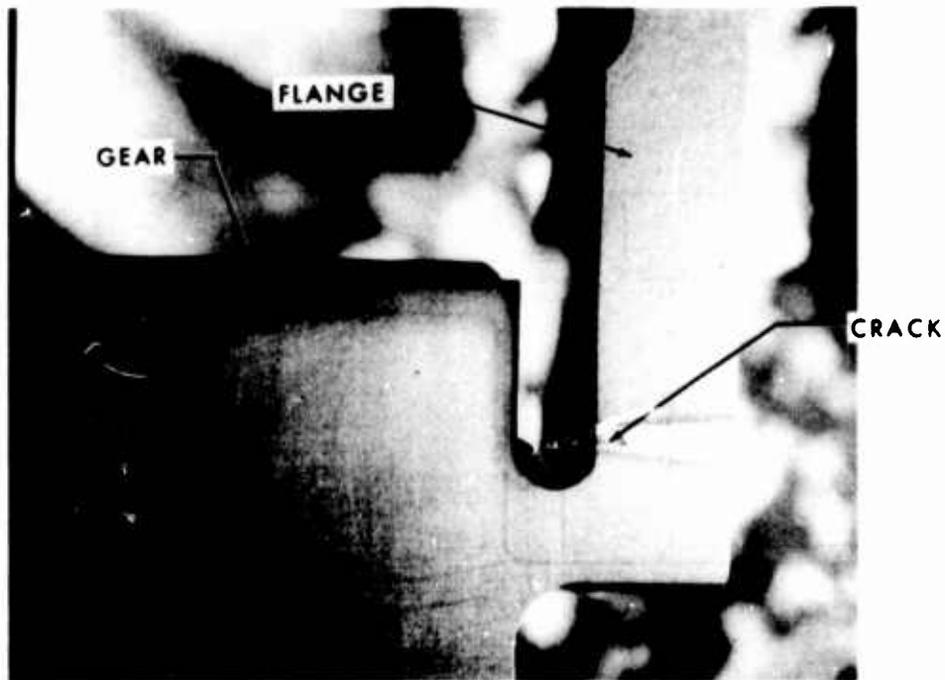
Crack Extending Through Flange/Gear Weld of Second-Row Pinion.
